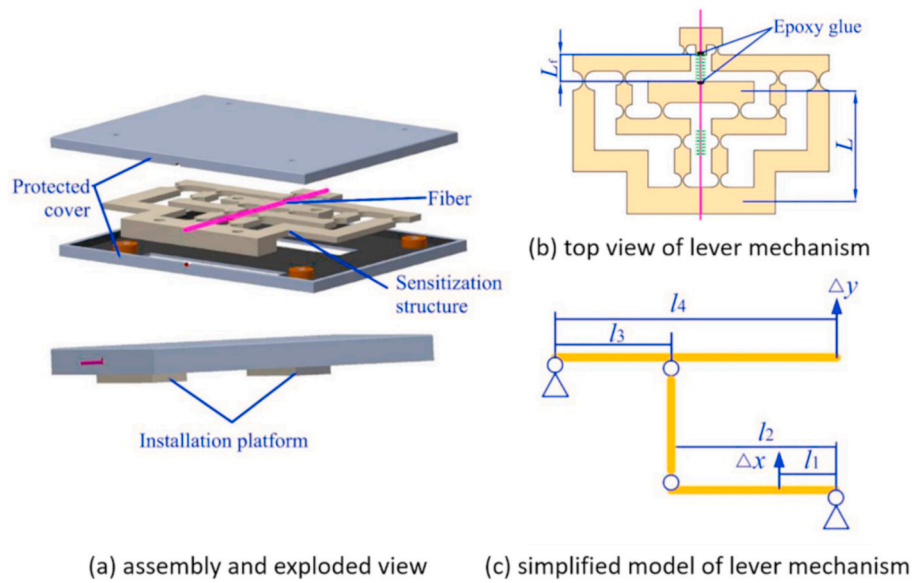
Structure of the sensitivity-enhanced FBG sensor. (a) assembly and exploded view; (b) top view of lever mechanism; (c) simplified model of lever mechanism. Adapted from Ref. [100]. Copyright 2019.
